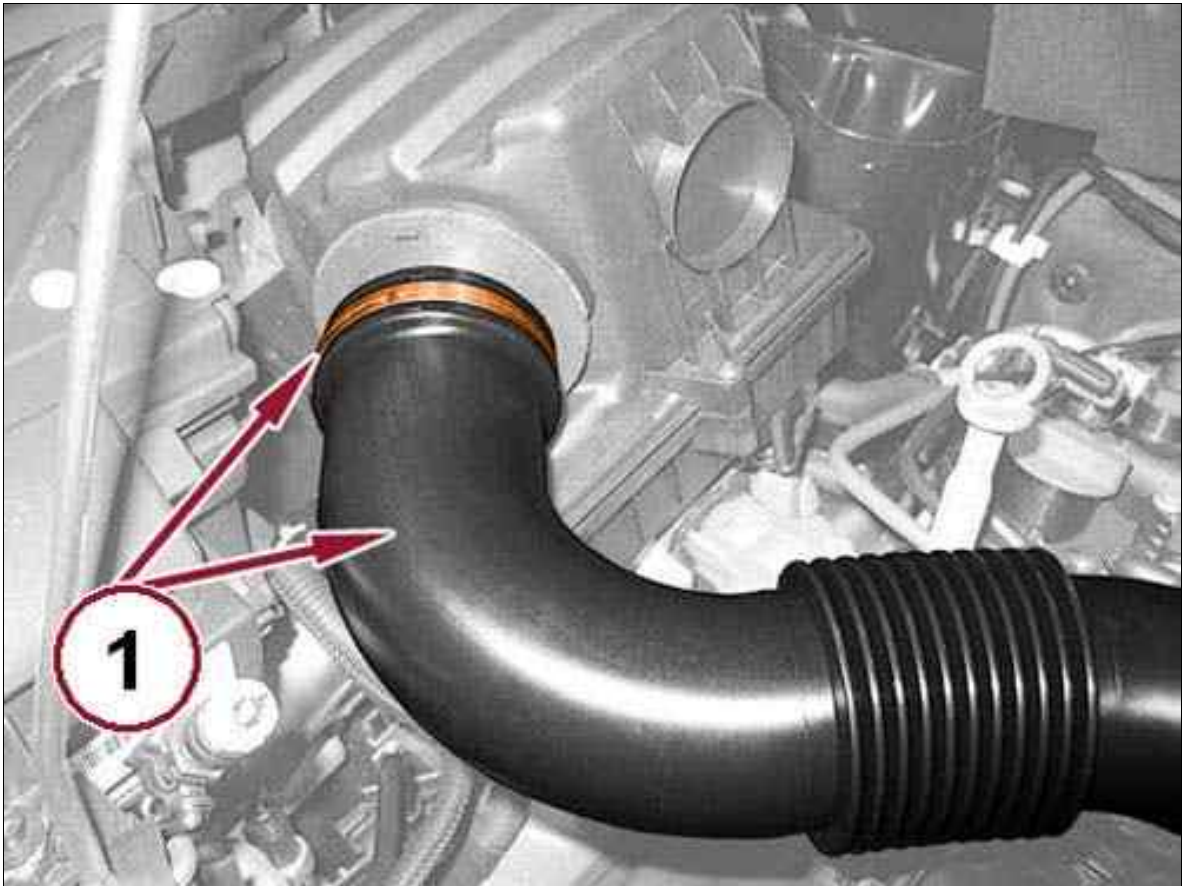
Oil Vapor Pipe Quick Coupling, Air Tube To Throttle Body Band & Air Tube Bolt
